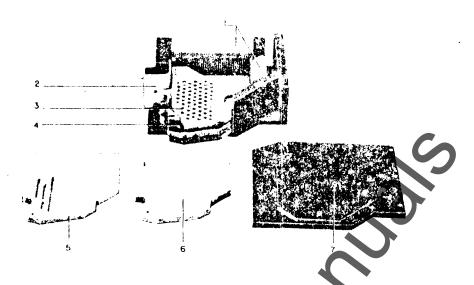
(8019408) Disassembled are quencher AKF outer poles.
